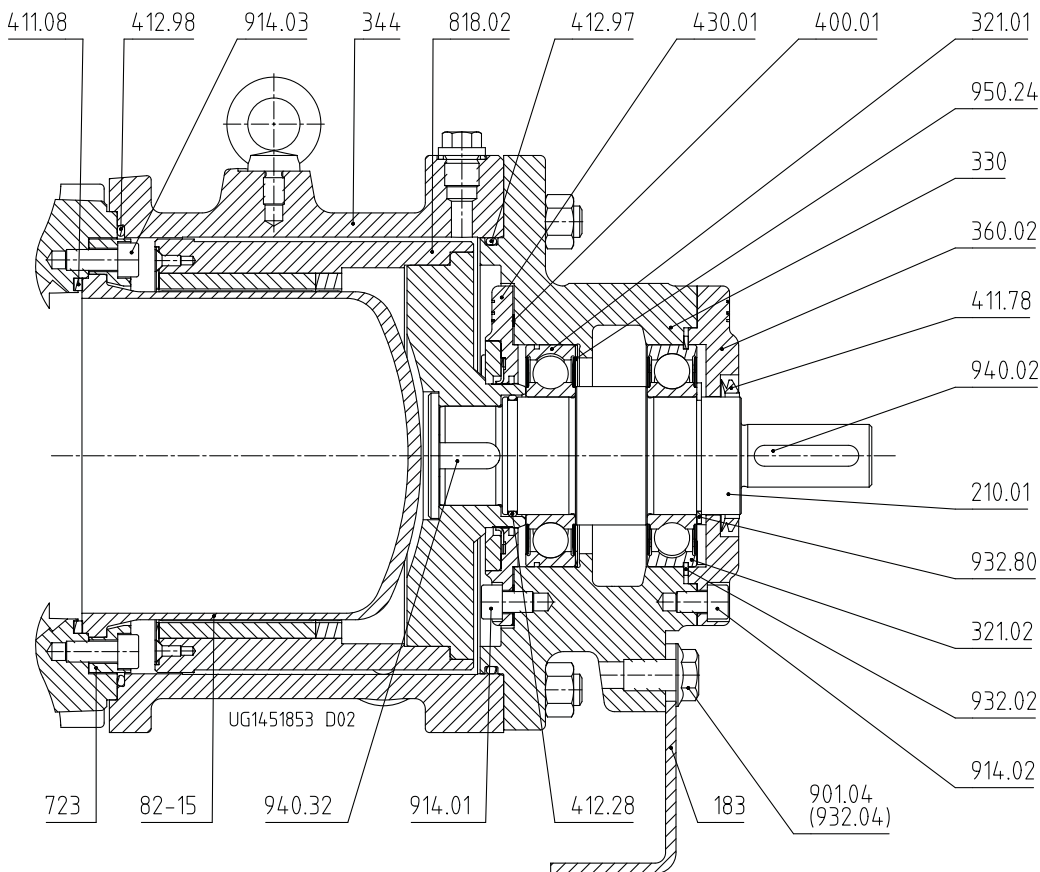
Model with bearing bracket with grease lubrication and shaft seal ring as leakage barrier
